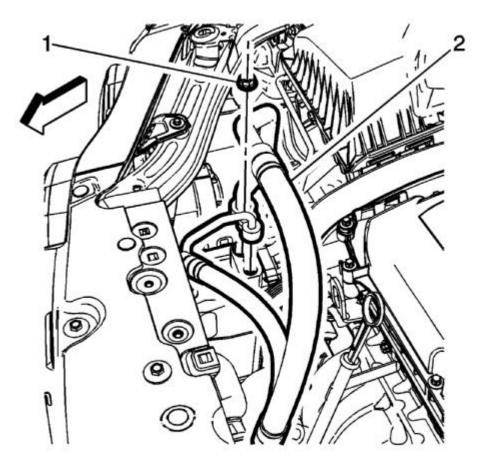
Air Conditioning Compressor, Condenser Hose & Nut Courtesy of GENERAL MOTORS COMPANY
